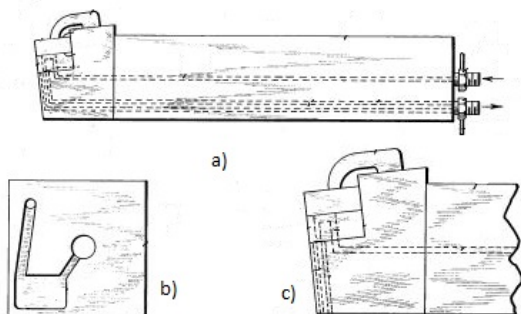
a) a side view of a tool holder; b) a plan view of the coolant channel machined into the cutting tool seat; c) a partial side view of the tool holder and insert [7]
